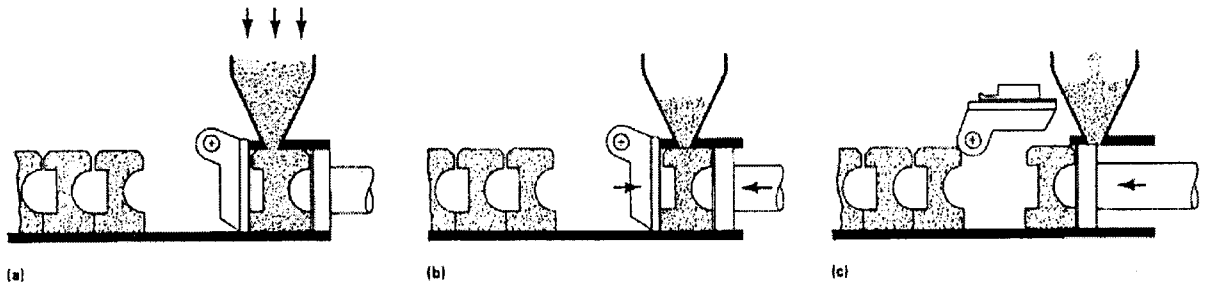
Blow-fill pressure squeeze molding machine making vertically parted molds. (a) Molding chamber filled with sand. (b) Sand compacted by squeeze pressure. (c) Finished sand mold pushed out of molding chamber
